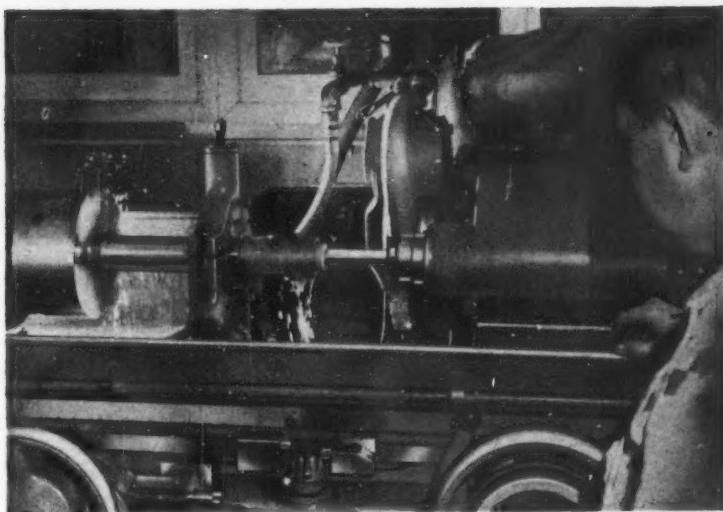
Set-up for Drilling the Holes for the Sighting and Focusing Knobs. Bosses are Subsequently Silver-soldered in Position over These Holes
